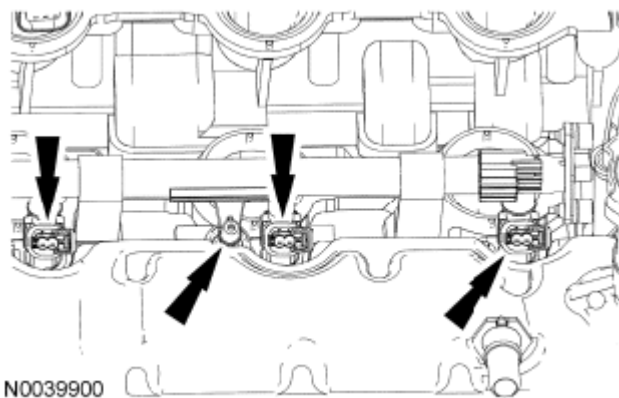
Locating Fuel Injector Electrical Connectors And Wiring Harness Retainers
